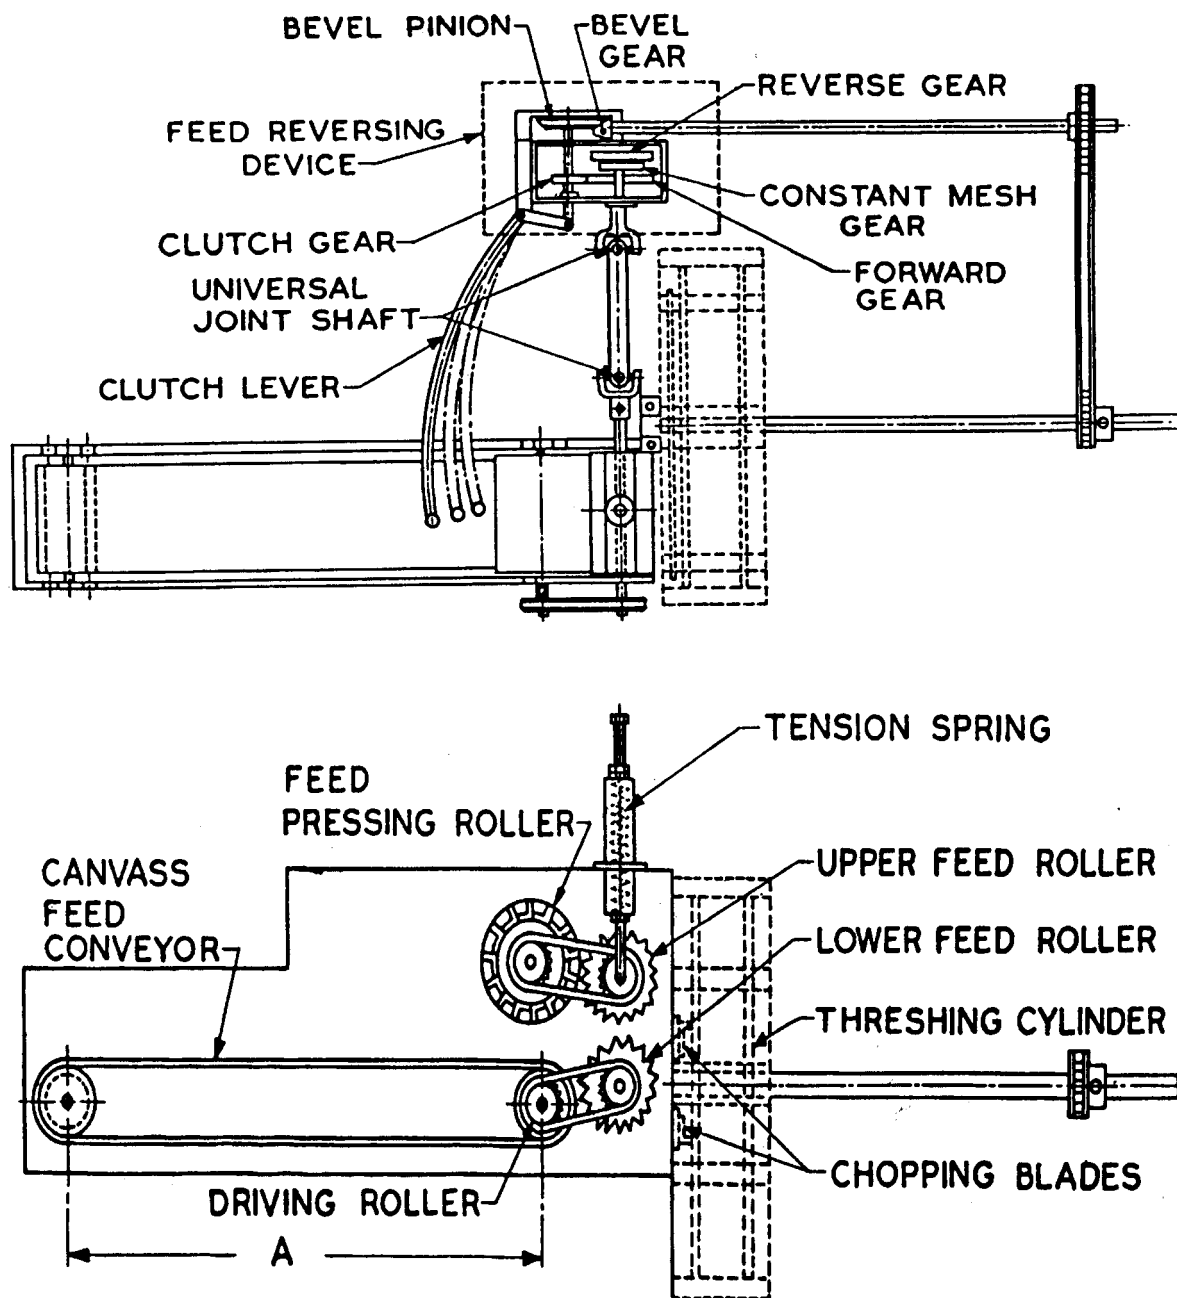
FEED REVERSING MECHANISM FOR CONVEYOR-FED CHAFF CUTTER
